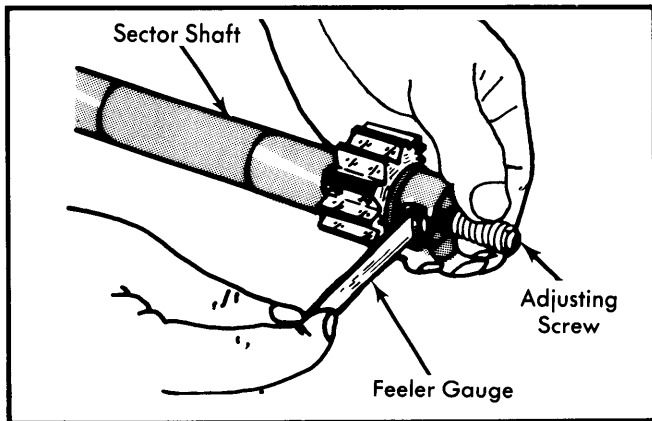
Checking Sector Shaft Adjusting Screw End Clearance
